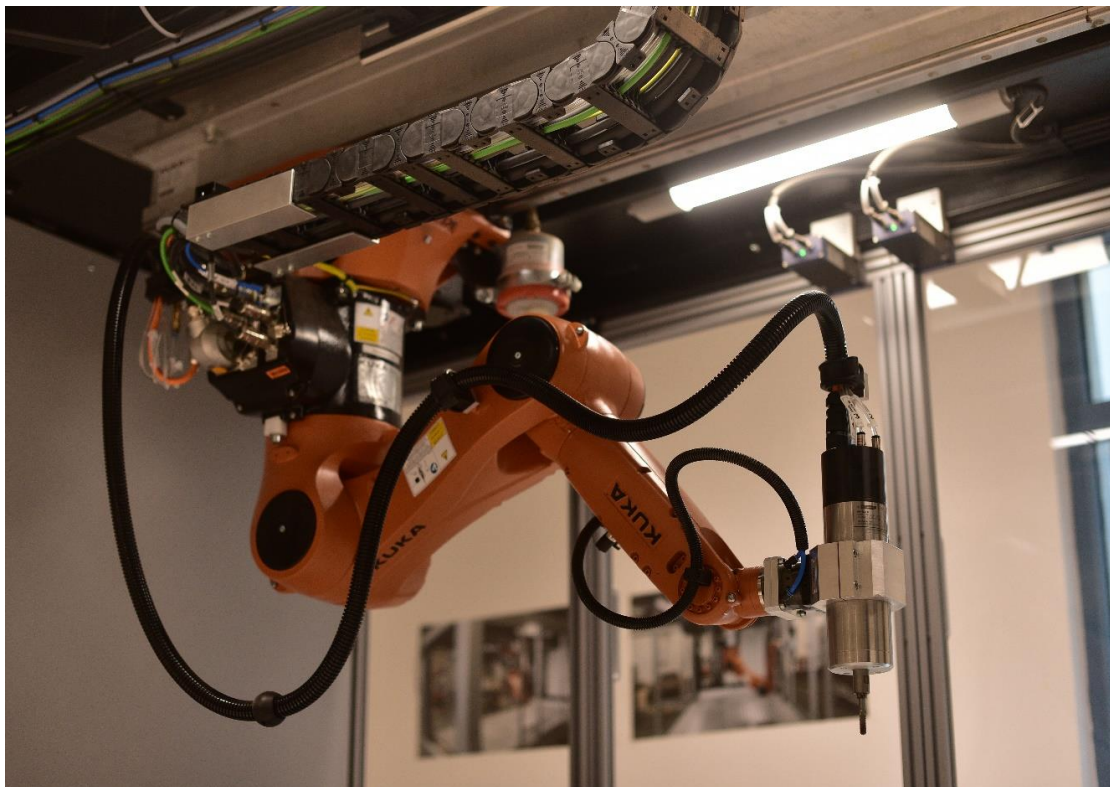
The 8-axis Robotic Machining Center with a KUKA Agilus Robot, Prof. Thorsten Lomker
